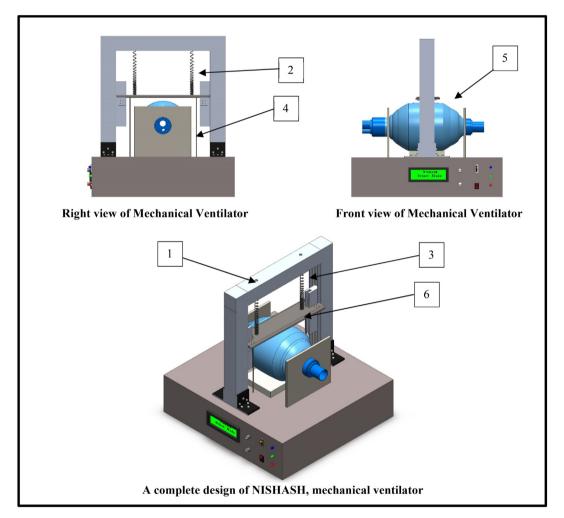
Solidwork® Design of the mechanical ventilator of NISHASH. 1. Stander. 2. Slider. 3. Mechanical Spiral Spring. 4. Nylon wire. 5. AMBU Bag. 6. Pressure plate.
